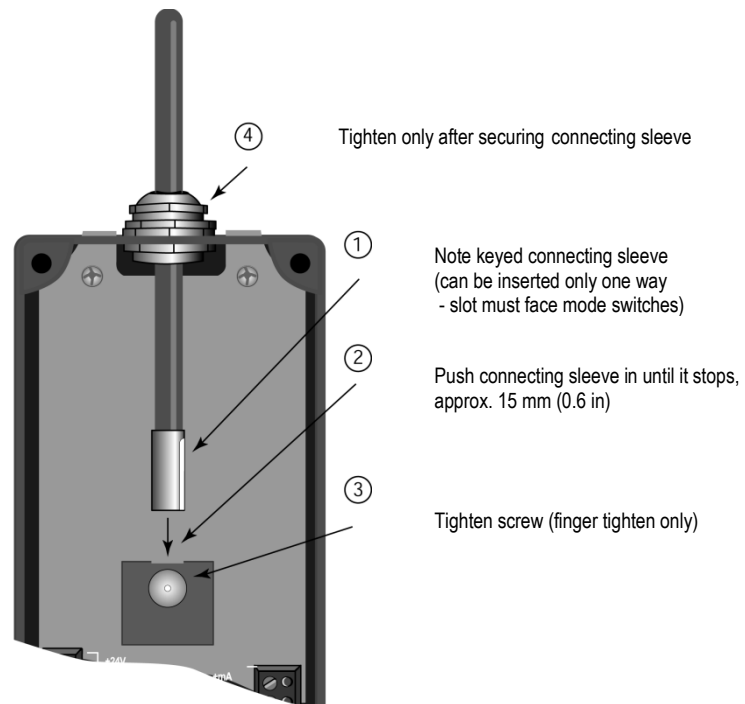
Attaching the Fiber Optic Cable to the Electronics Housing
